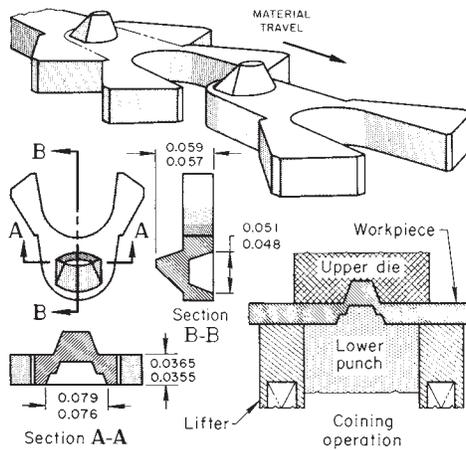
Copper alloy C22600 interlocking-fastener element produced by coining and notching in a progressive die. Dimensions given in inches
